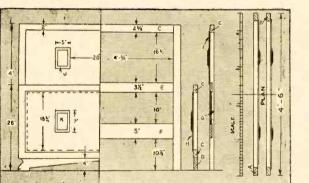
Scale elevations and sections of head and foot ends of bedstead. Plan given at right.
